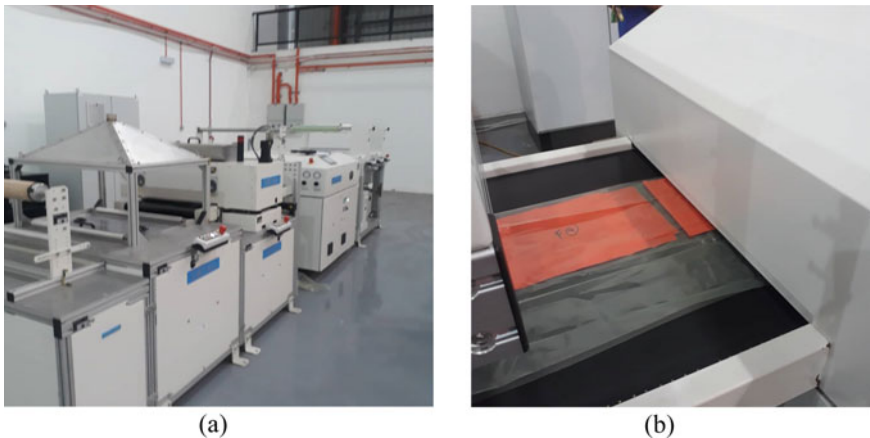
Lamination machine system used for prepreg fabrication, a complete set of laminating machine system b wetted prepreg with polyethene protector on machine conveyor
